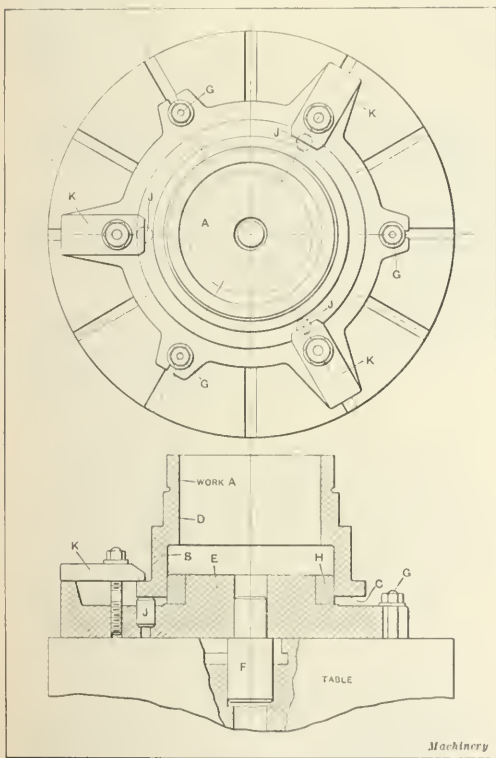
Fixture for performing Final Machining Operations on Partially Finished Casting *A
